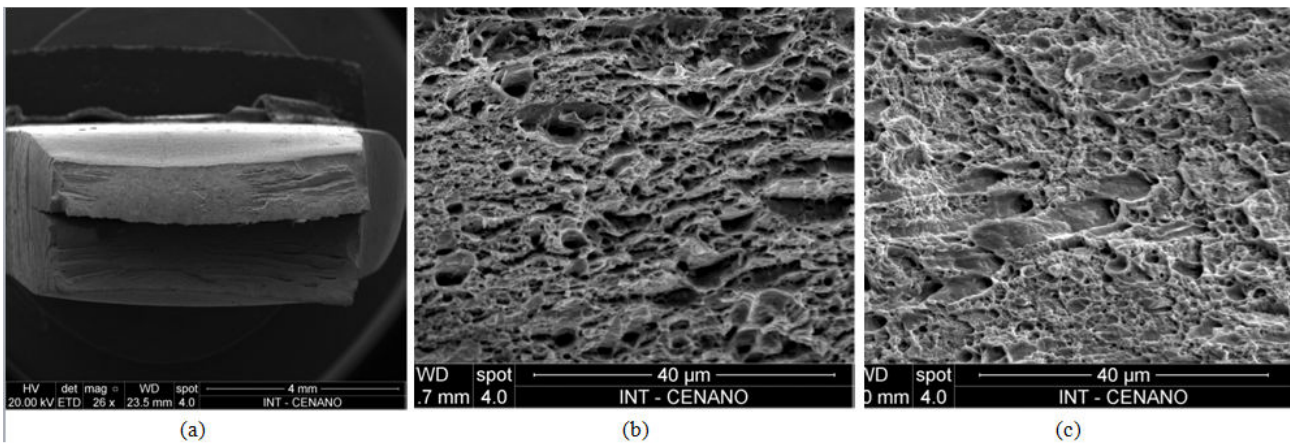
Fractography of the specimens after testing in media A. (a) Macroscopic appearance, (b) Fractography from central region (ductile fracture), (c) Fractography from edge region (ductile fracture).
